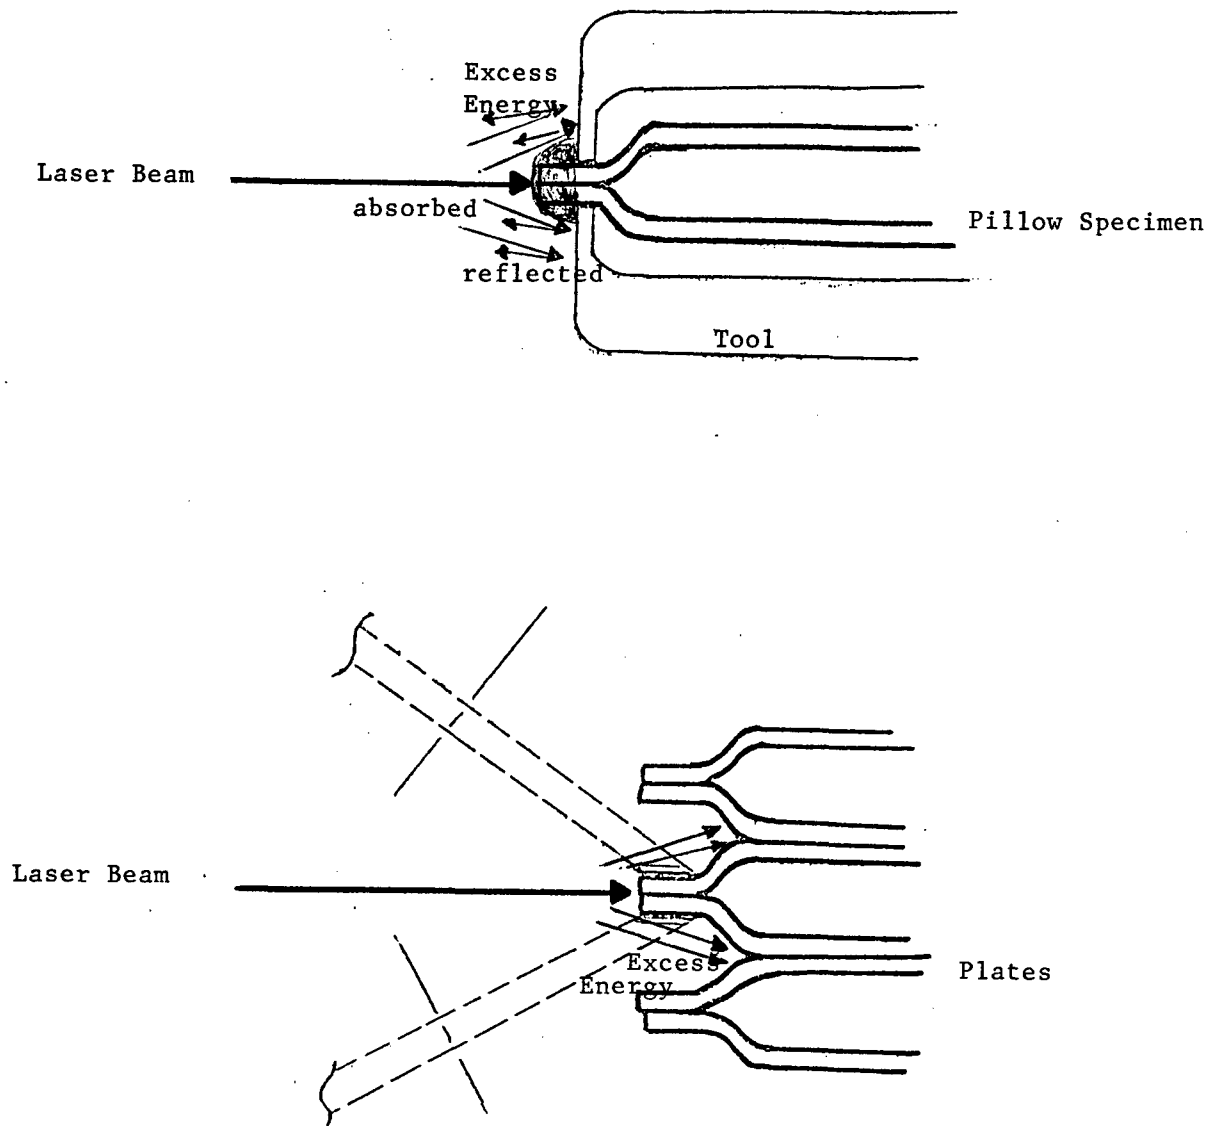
Comparison of "Pillow" Specimen Tool and Prototype Tool
